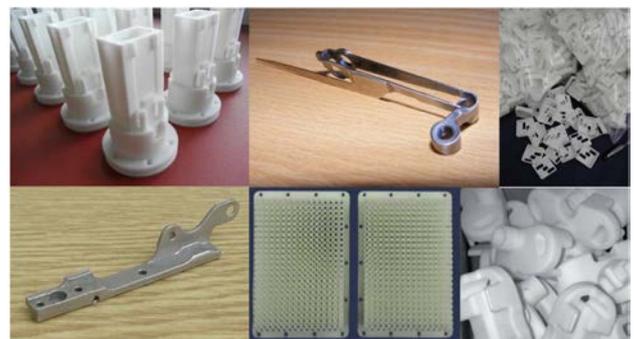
Collection of parts manufactured and used in industrial assemblies.
